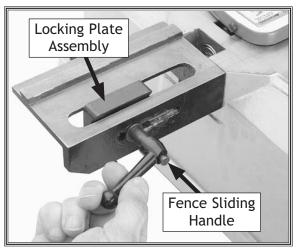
Securing the locking plate assembly with the fence sliding handle.
